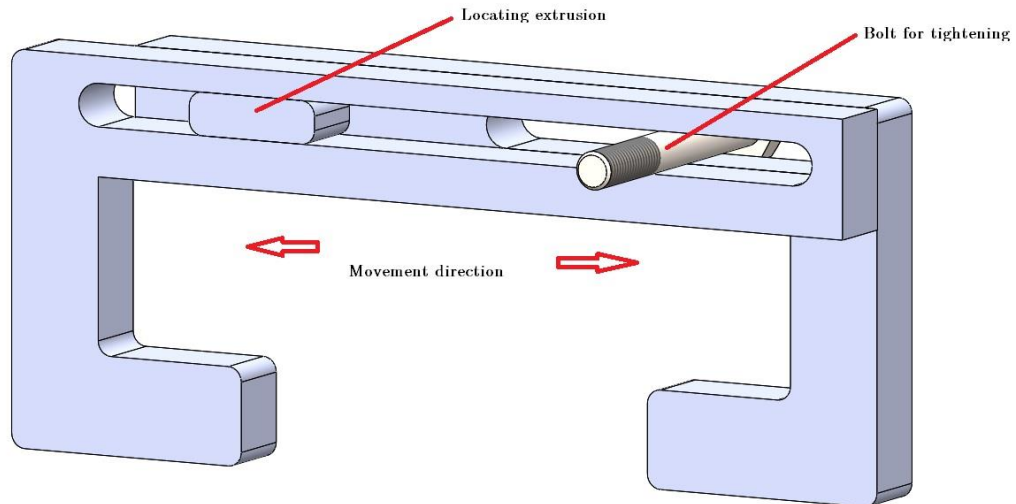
Isolated view of the clamps used to hold the motor housing to the frame body
